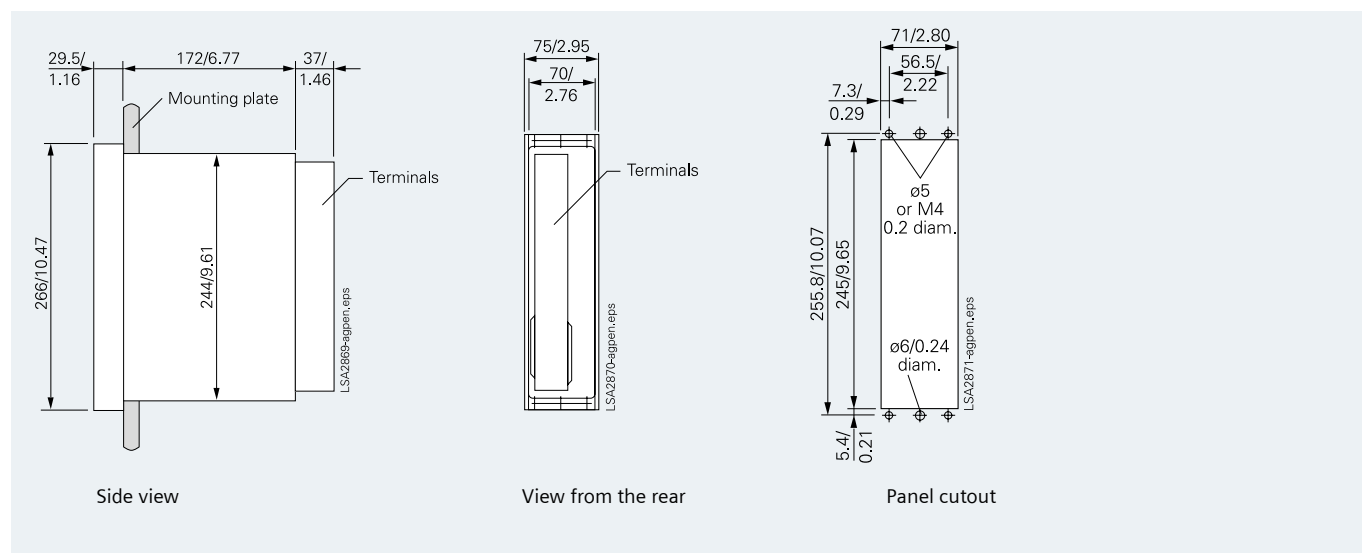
/15 Housing for panel flush mounting/cubicle mounting, terminals at rear (1/6 × 19")
